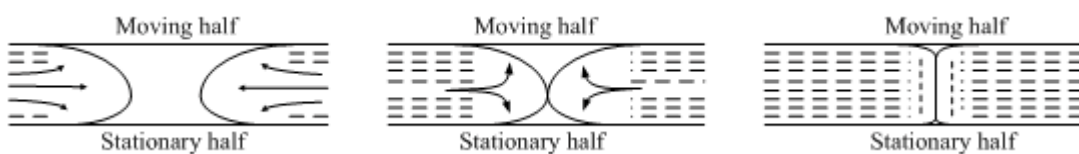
The forming process of the weldline in the RHCM process: (a) filling stage, (b) packing stage, and (c) after cooling
